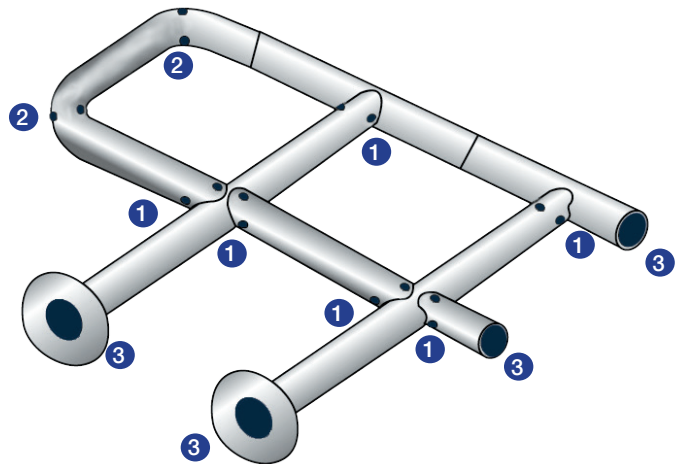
External vent holes should be visible on the outside of pipe assemblies
